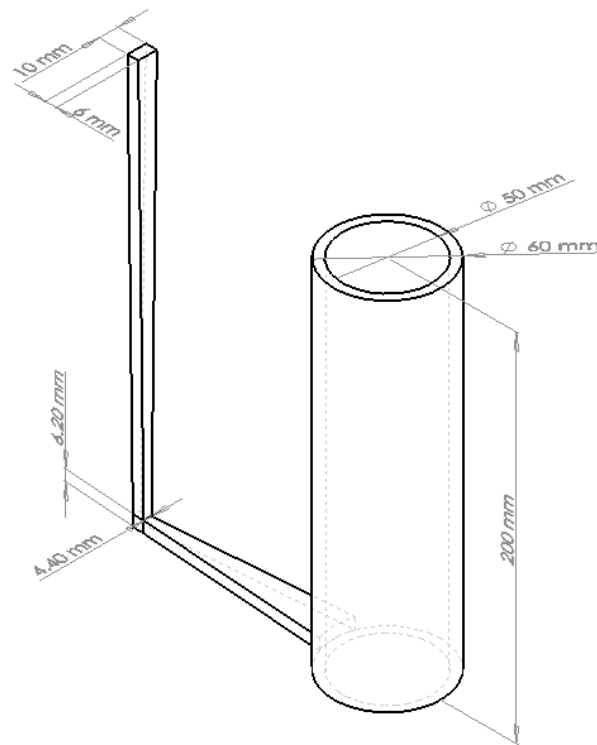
An isometric view showing the geometry and dimensions of the cast tube used in the low melting point alloy experiments.
